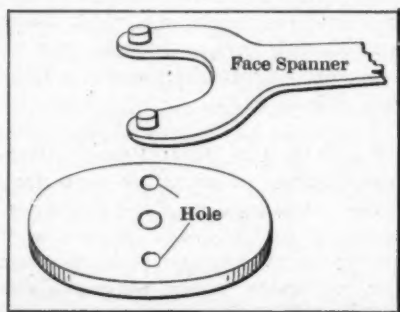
Face spanner and face nut, showing holes in nut and projections on spanner
